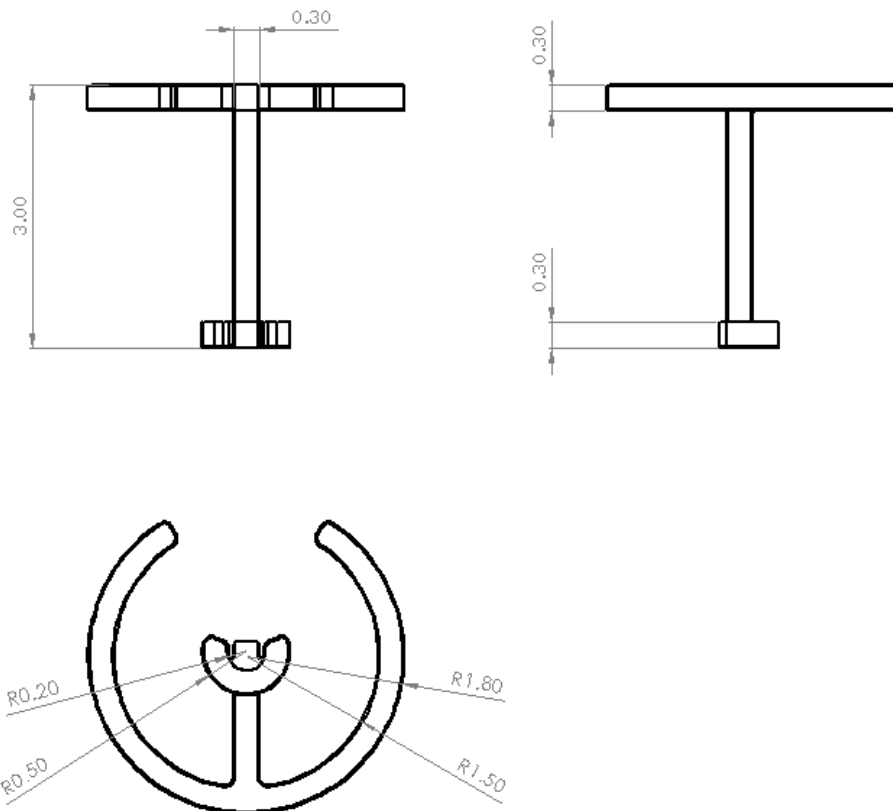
CAD drawing of Concept 2A: metal forming (laser cutting) after bending. The model is 3.0 mm long, as an example.
